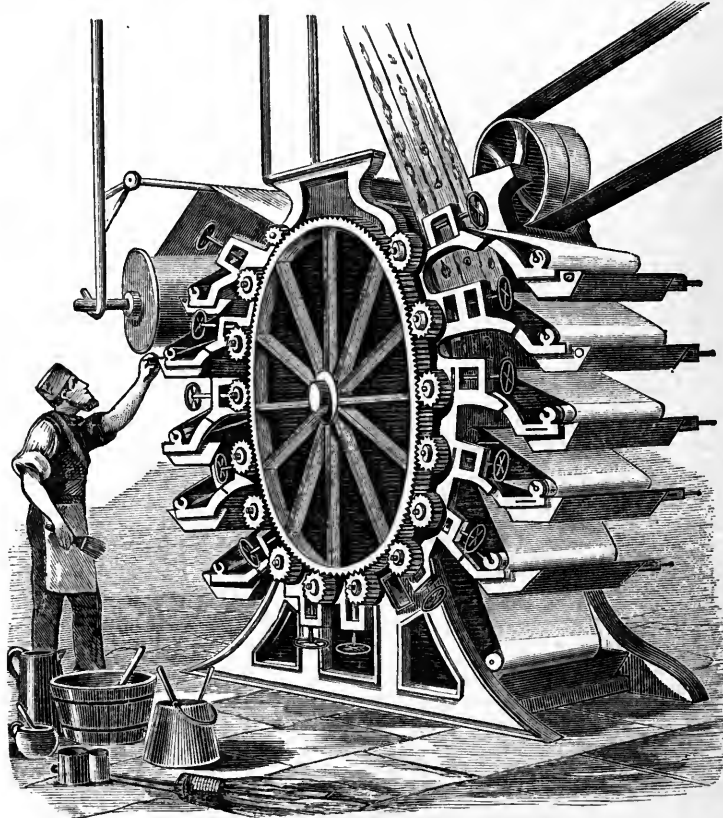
MACHINE FOR PRINTING PAPER-HANGINGS.
